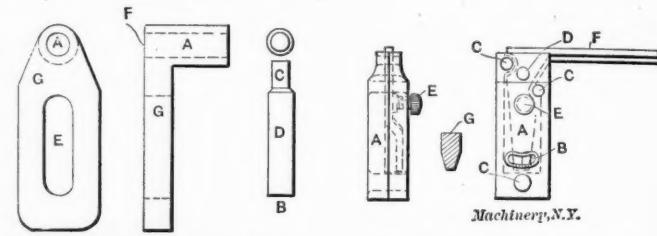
Device for Locating Holes for Punches in Punch Holders.
